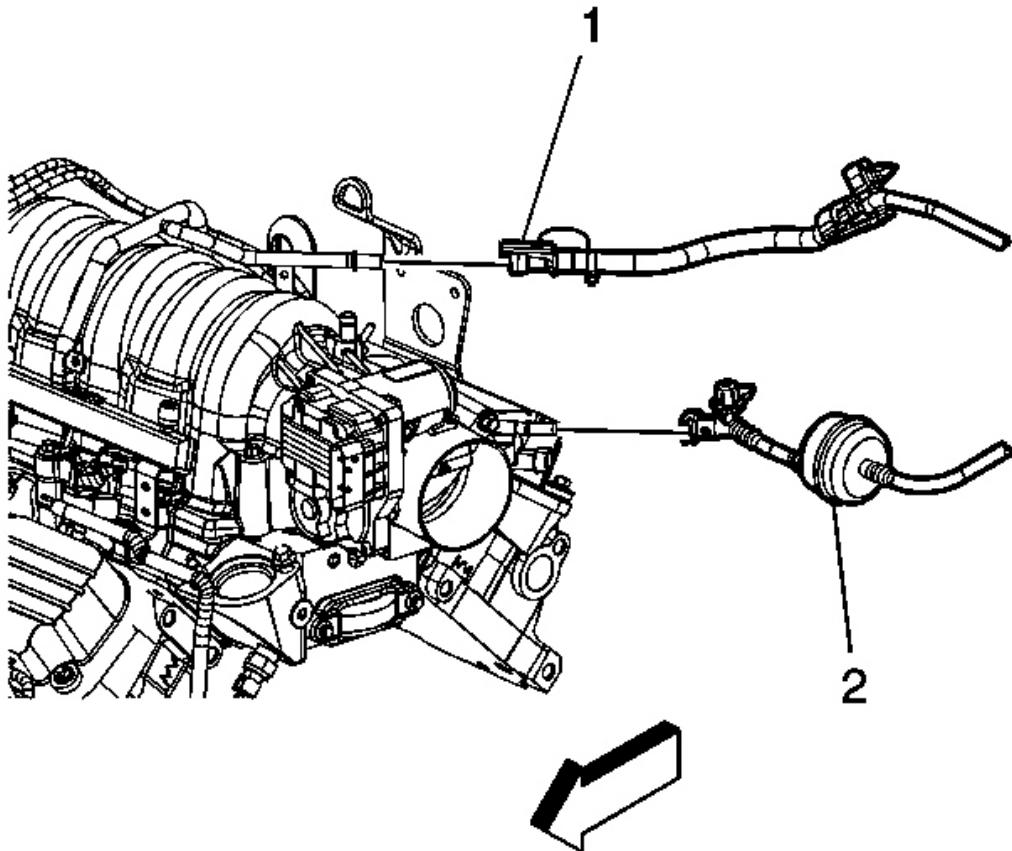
Locating Engine Wiring Harness & Heat Shield
